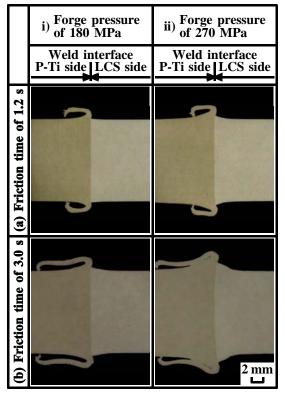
Cross-sectional appearances of weld interface region of joints at various forge pressures; friction pressure of 30 MPa and friction times of 1.2 and 3.0 s.
